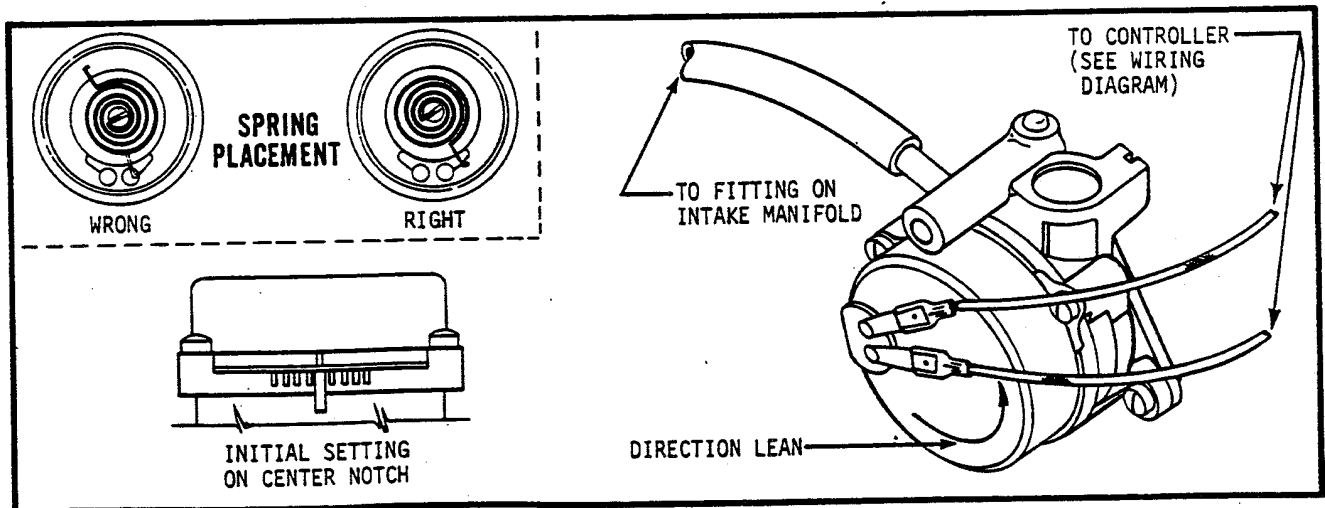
CARBURETOR MOUNTED TYPE AUTOMATIC CHOKE
